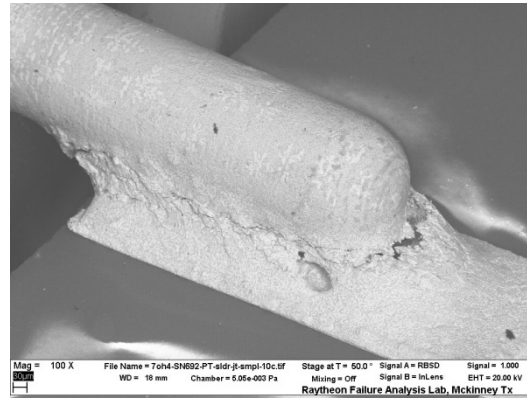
Solder Joint from Pin to Surface-Mount Circuit Board Pad Exhibited a Crack (100X).
